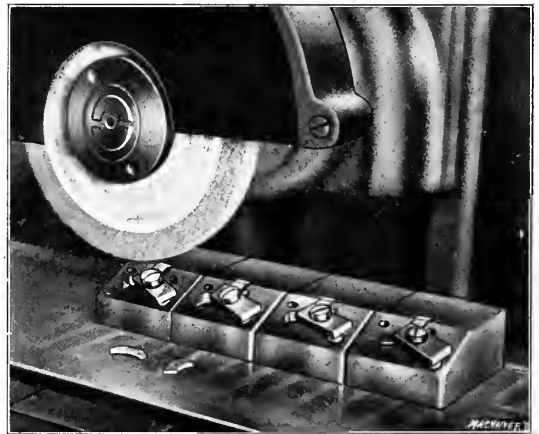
Holding Small Punchings for a Bevel Grinding Operation
